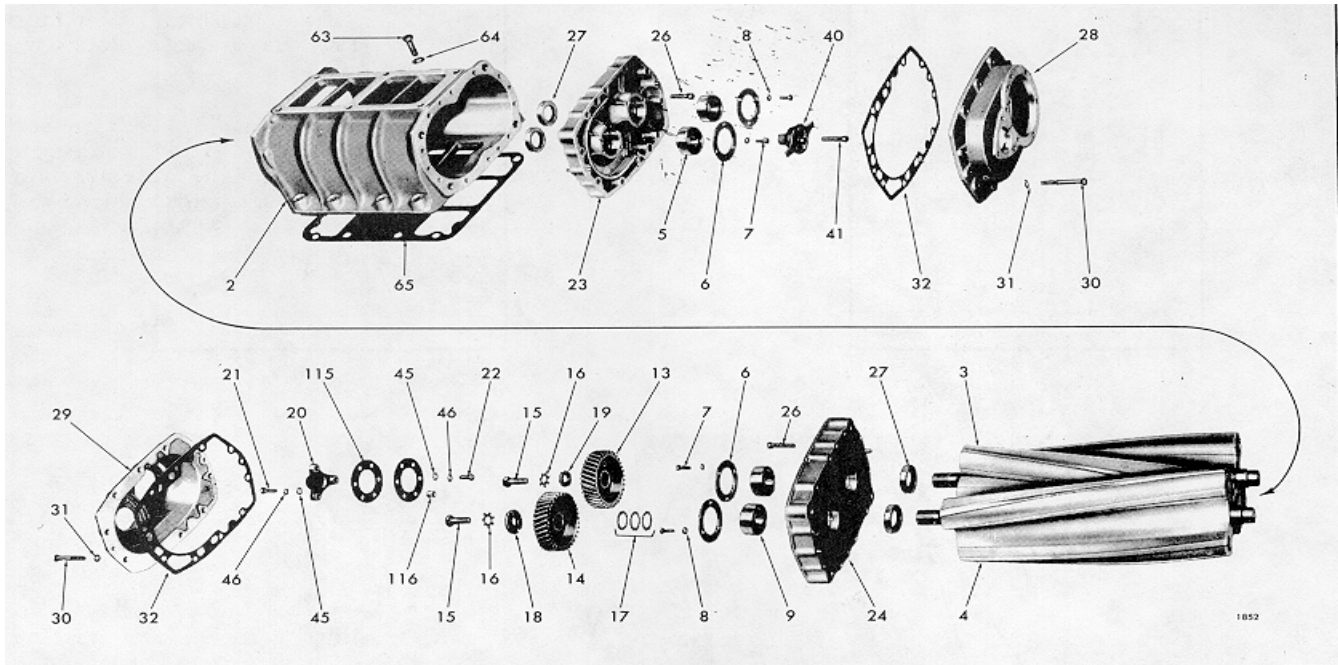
Typical Details and Relative Location of Parts - Standard and Small Diameter Rotor Six Cylinder 71 Blowers
